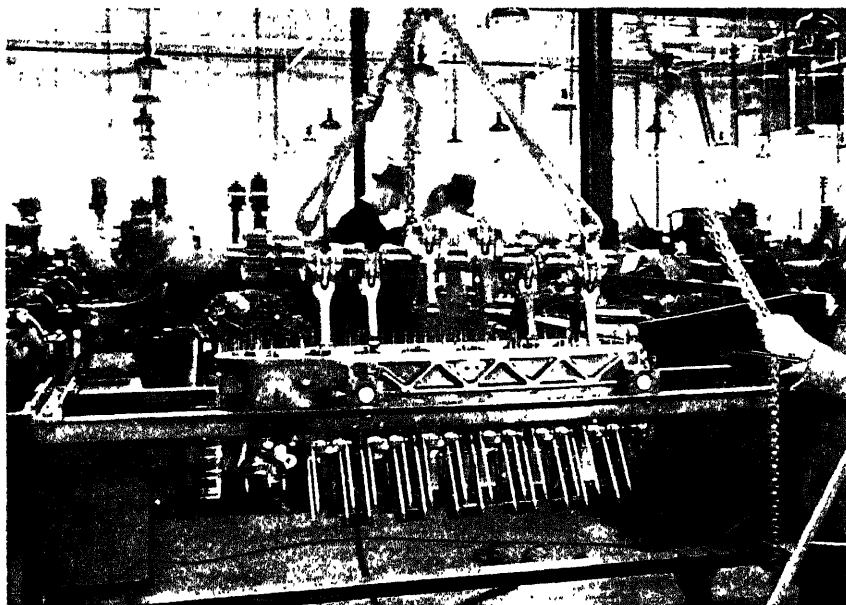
LOWERING THE CRANKSHAFT AND CONNECTING RODS INTO THE CRANKCASE
